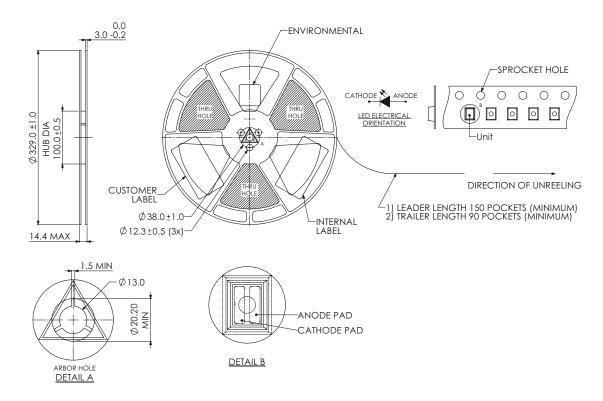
Reel dimensions for L1IZ-AXXX000000000. Notes for Figure 13:
